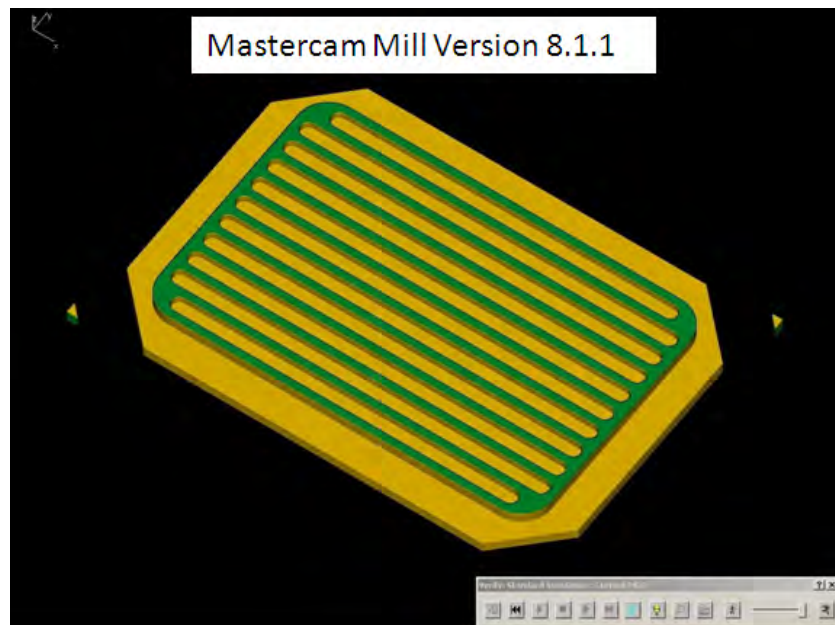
Mastercam toolpath for the bottom profile of the heat sink. MONTe Heat Sink Bottom.mc8
